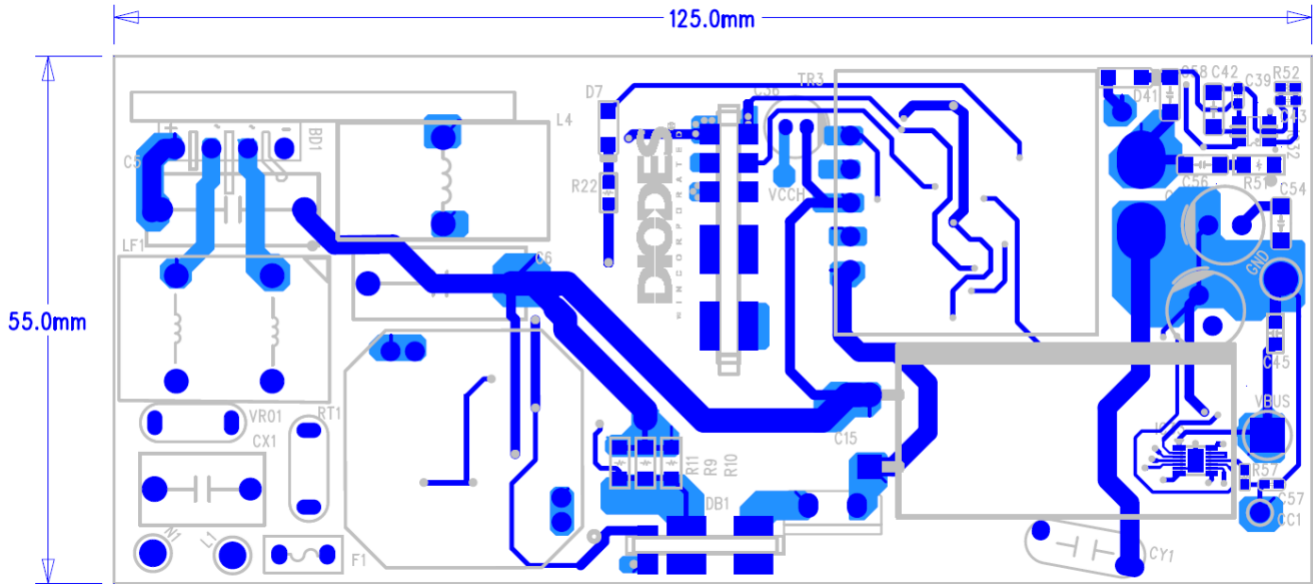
140W ACF+GaN PD3.0 Adapter EVB Main Board PCB Layout – Top View
